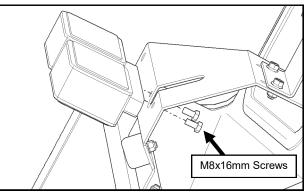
(Assemble OEM Side Lights to Cab)
